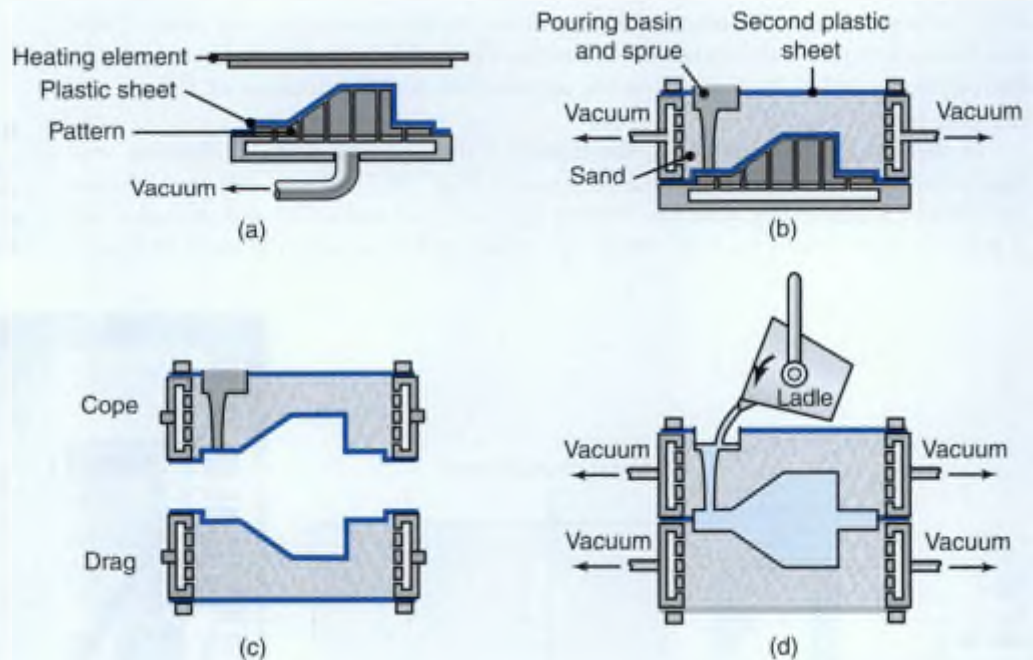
The vacuum molding process. (a) A plastic sheet is thermoformed (see Section 19.6) over a pattern; (b) a vacuum flask is placed over the pattern, a pouring basin/sprue insert is located, and the flask is filled with sand. A second sheet is located on the top of the sand mold, and vacuum is applied to tightly compact the sand against the pattern. (c) A drag is also produced, along with cheeks, cores, etc., as in conventional sand casting; the cope and drag can be carefully transported without vacuum applied. (d) After the mold halves are joined, vacuum is applied to ensure mold strength, and molten metal is poured into the mold.
